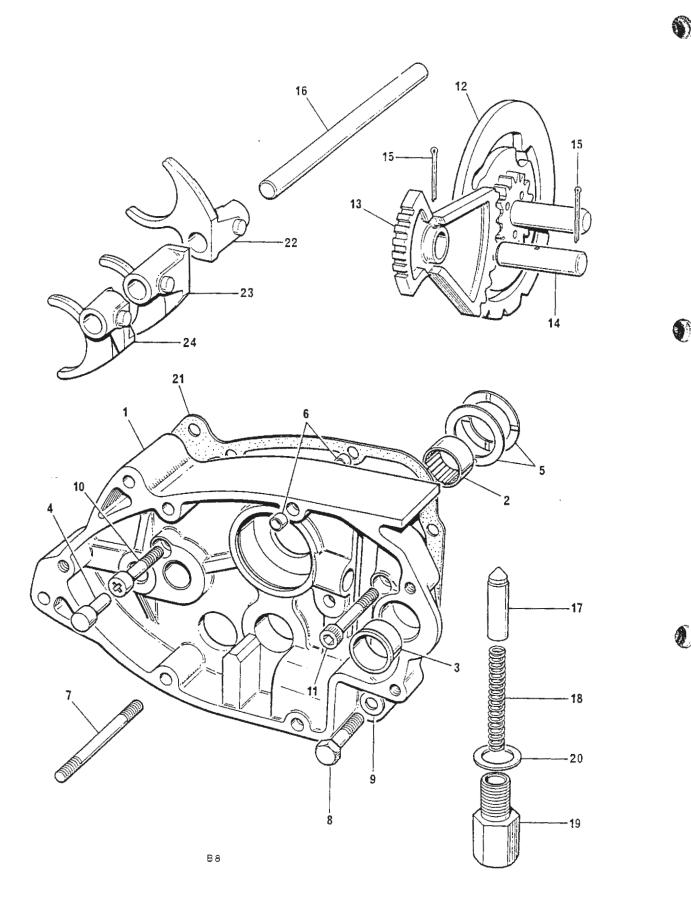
GEARBOX INNER COVER AND SELECTORS
